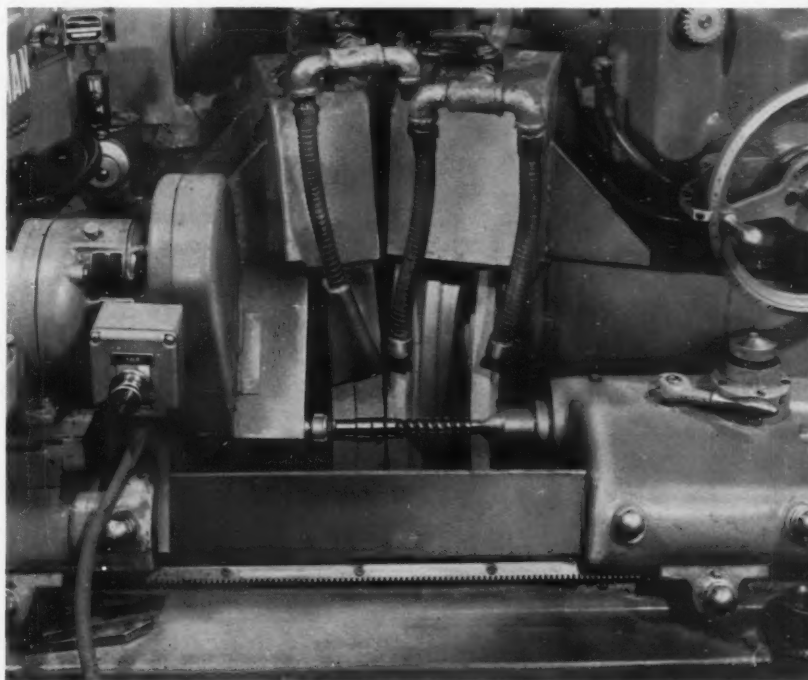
Internal grooves in ball bearing nut are cut by milling cutter on this hobbing machine. Nut is clamped in a hydraulically operated fixture.
